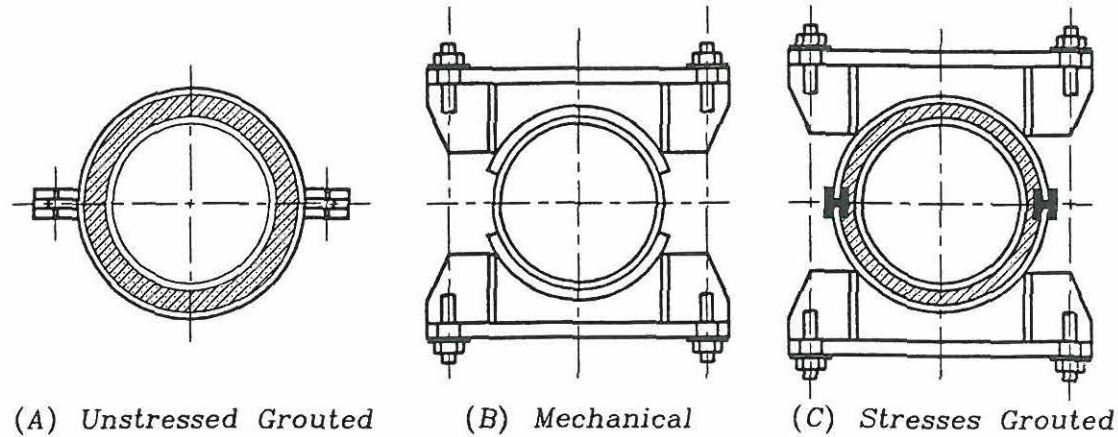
Clamp cross-sections (Tebbett and Lalani, 1986).
